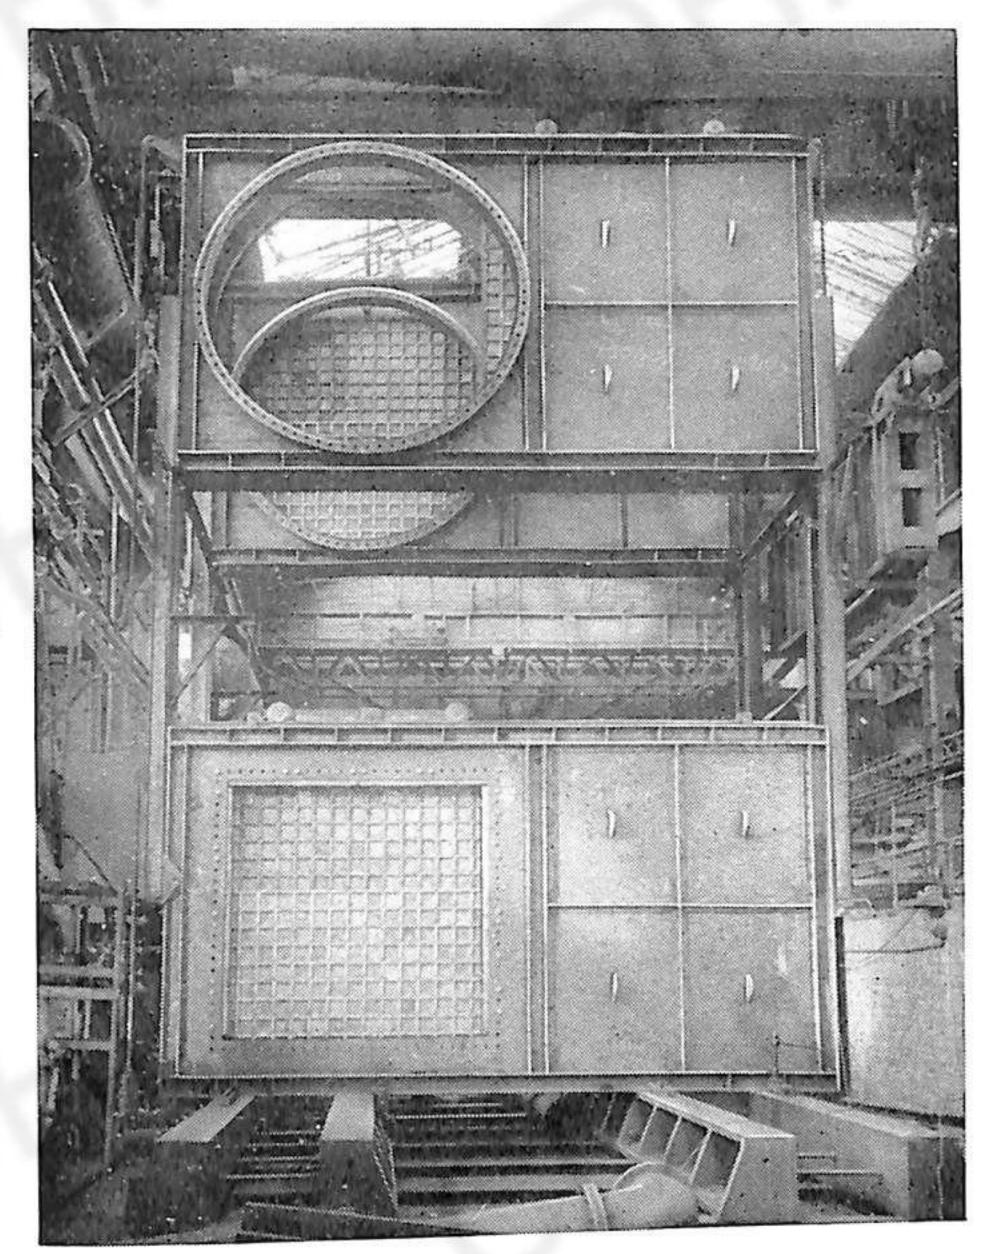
Combined damper assembly showing by-pass damper (top) open and spray box inlet dust damper (bottom) closed
